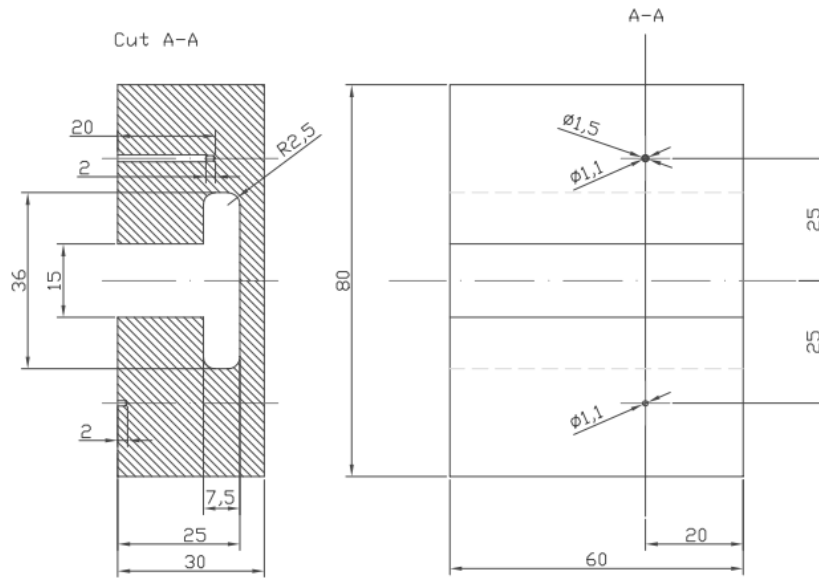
Technical specification of the samples. All the measurements are in mm.
